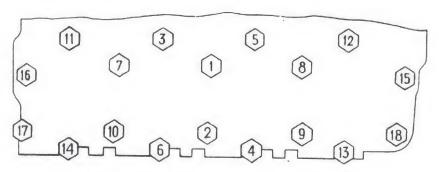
CYLINDER HEAD NUTS TIGHTENING ORDER
